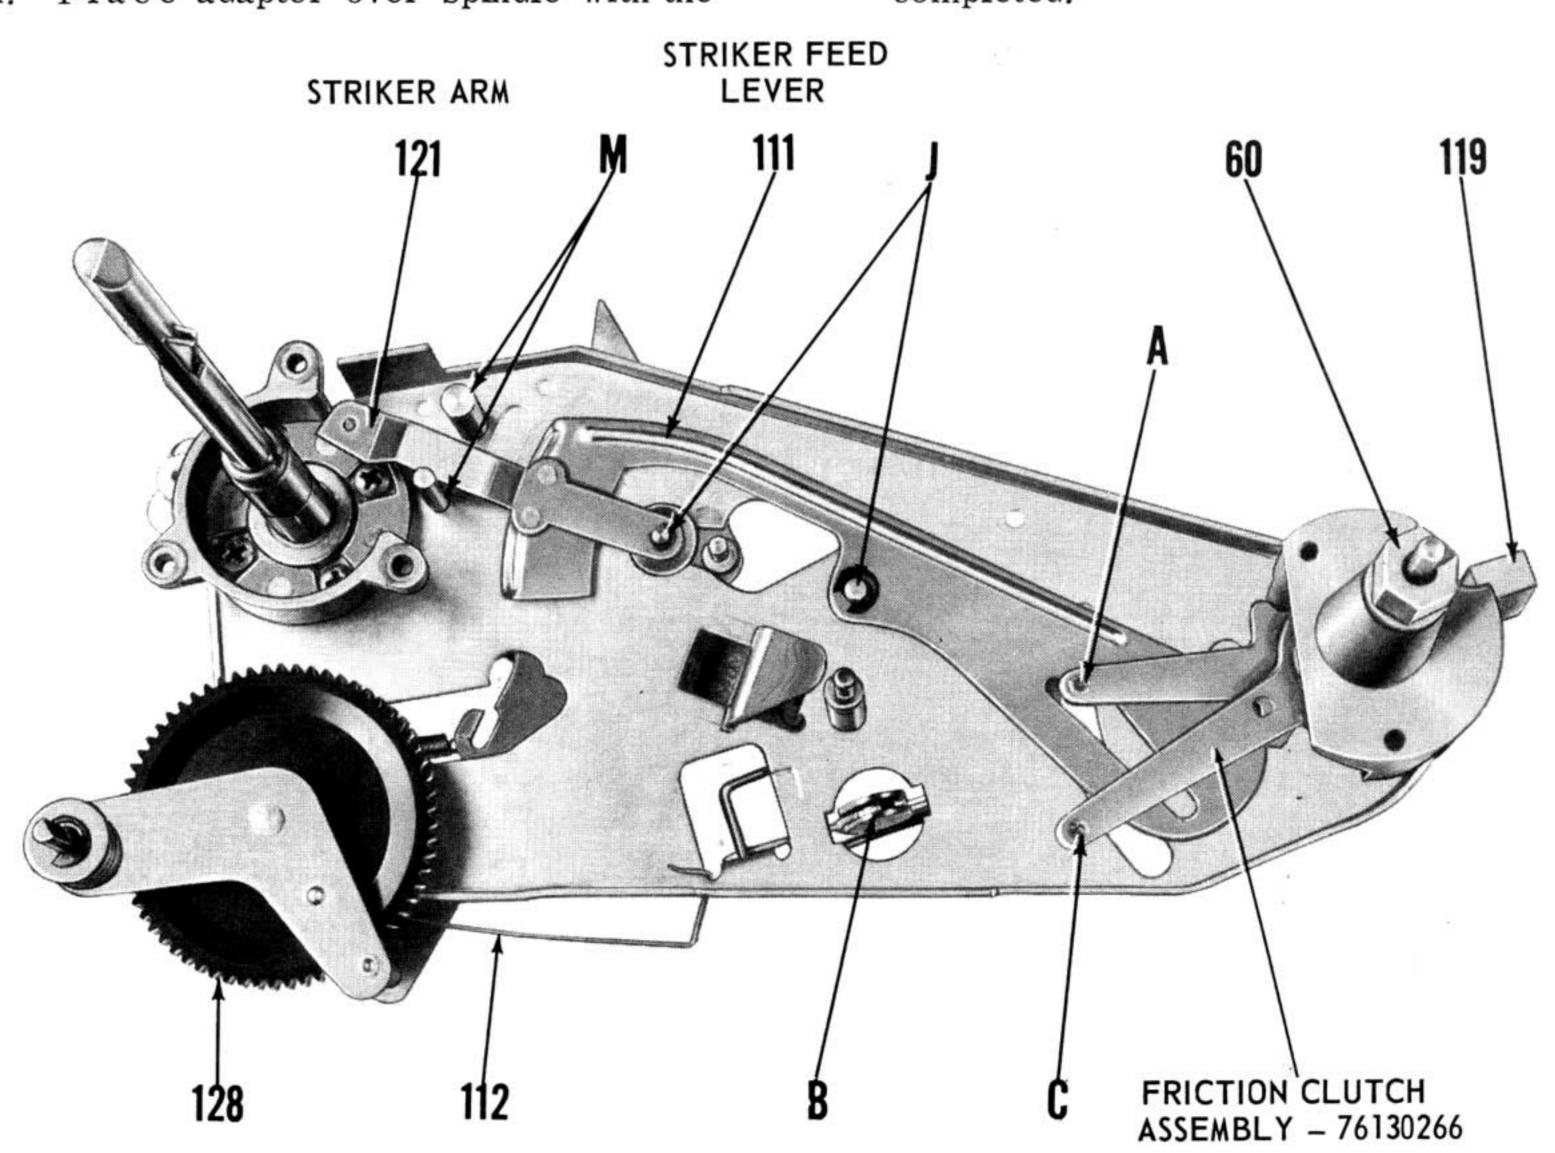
Sub-Plate Assembly with Cam Gear Removed
